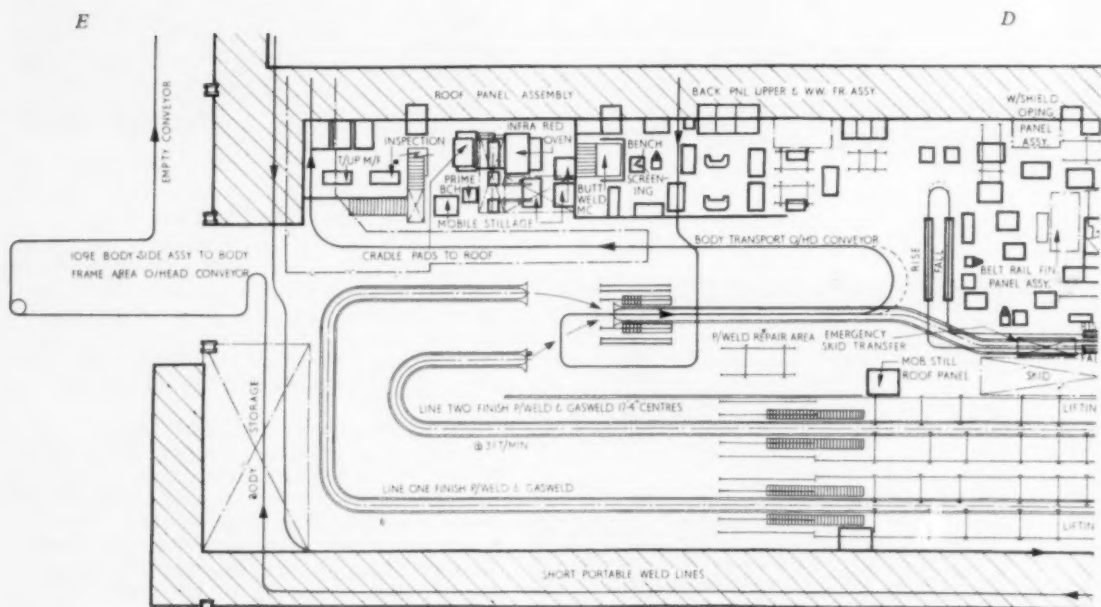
Layout of Ford Consul Classic main body assembly section. X shows position of two-stage multi-weld set-up
